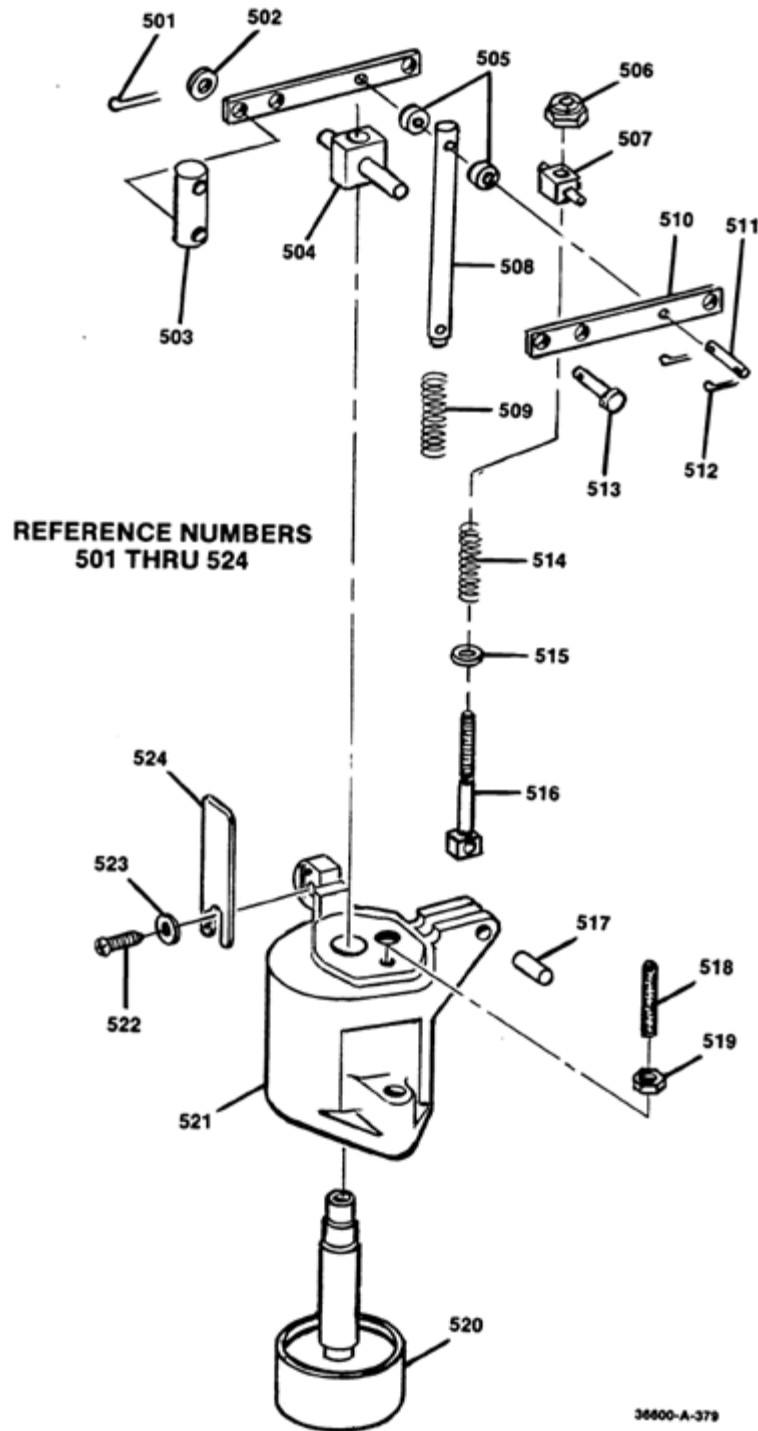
Illustrated Parts of Speed Setting Cylinder
